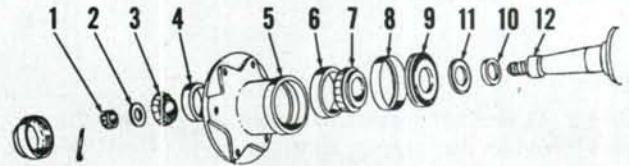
Views of front wheel hub assembly used on dual front wheel tricycle models. Wide front axle models are similar except spacer (10) and shield (11) are not used.
